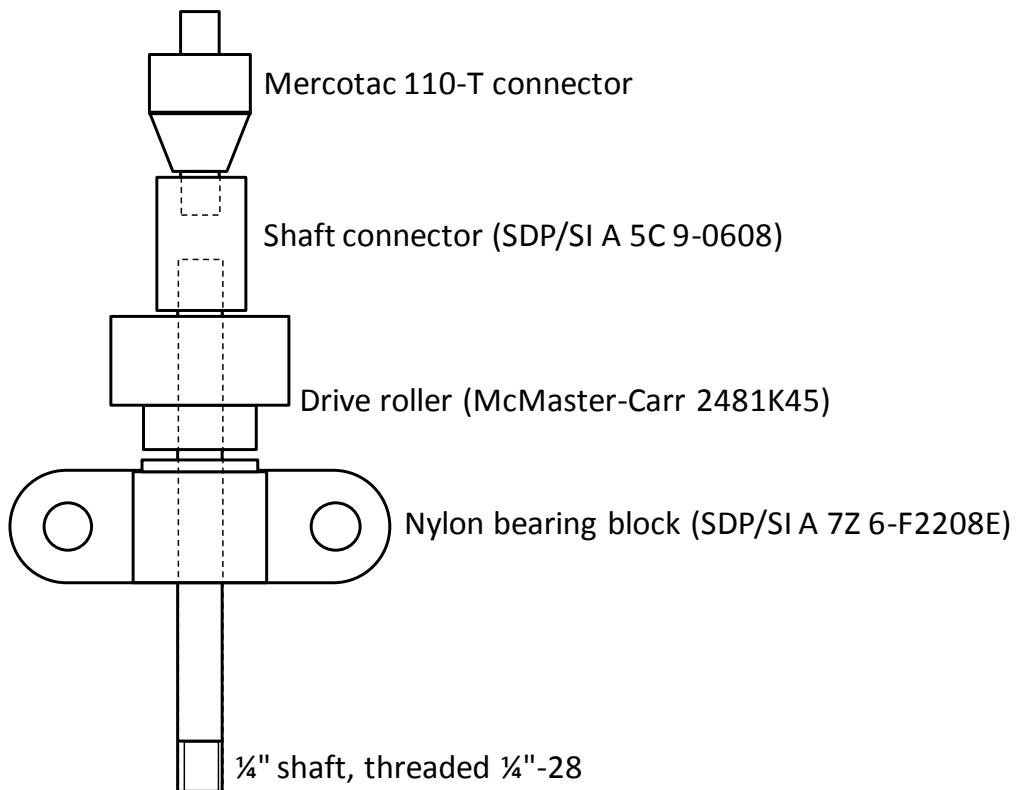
Sketch of parts of the mercury contact system of rotating electrode.
